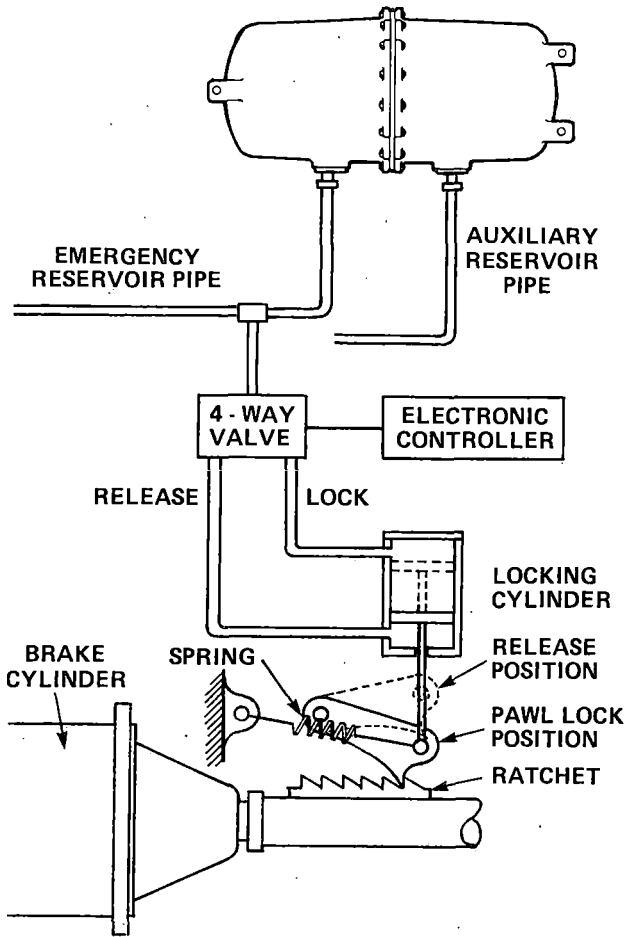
CONCEPTUAL DESIGN OF A BRAKE LOCKING MECHANISM
